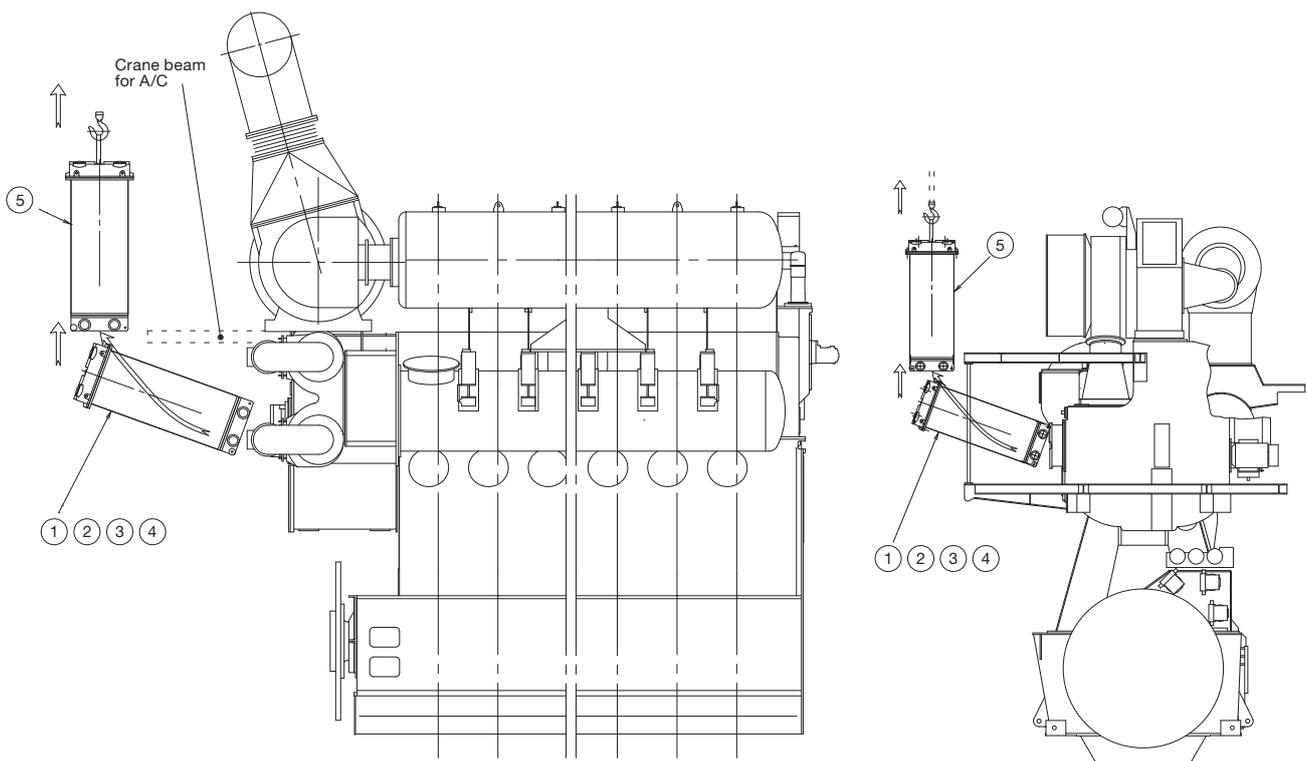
Crane beam for overhaul of air cooler, turbocharger located on aft end of the engine
